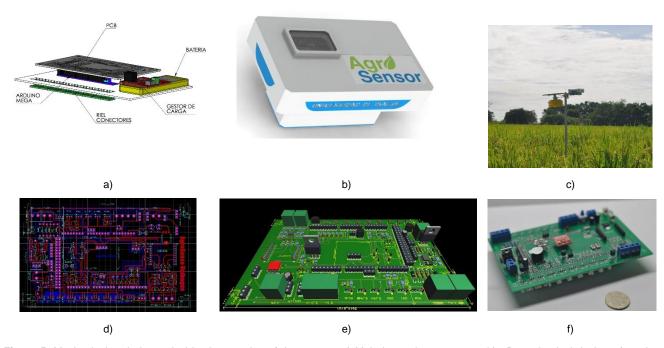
Mechanical and electronical implementation of the system: a) Main internal components; b) 3D mechanical design; c) station working into a rice crop in Ibagué Tolima; d) Printed Circuit Board PCB station design; e) 3D board representation; and f) Final board implementation.
